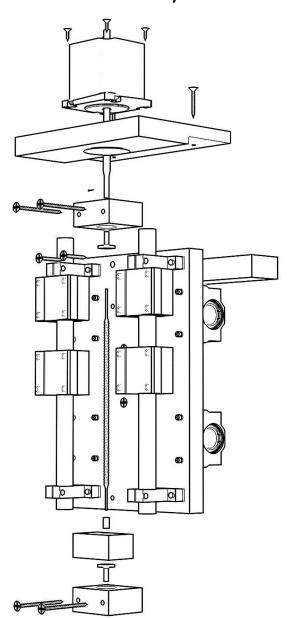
(ADDING THE MOTOR SUPPORT AND THE ASSEMBLY IN FIG 19)
